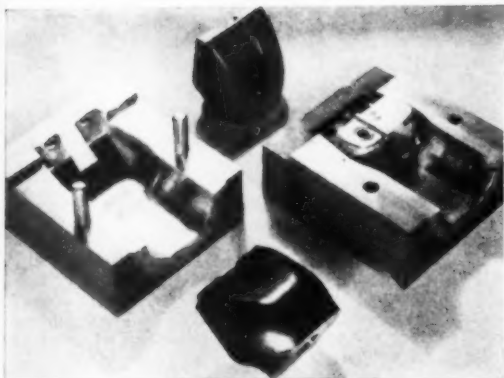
These dies mold the Bakelite clipper head shown below them. The forming cavity for each half was reproduced on the Duplicator (Fig. 1) in 6 hours and the rest of the work done by ordinary milling.
